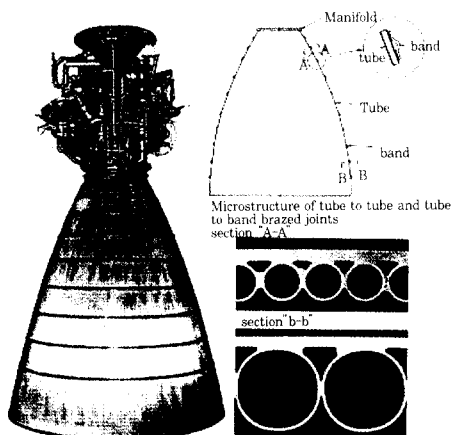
Appearance of rocket engine and cross section of brazed nozzle skirt
